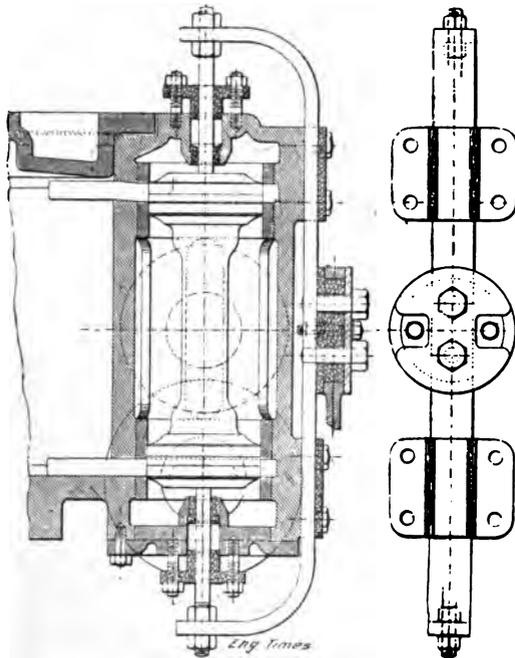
“ROBINSON AND AUDEN” ENGINE VALVE DRIVE.
